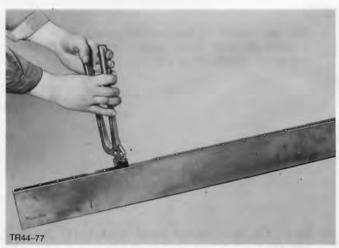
Punch new rocker panel extension at upper spot weld flange.
